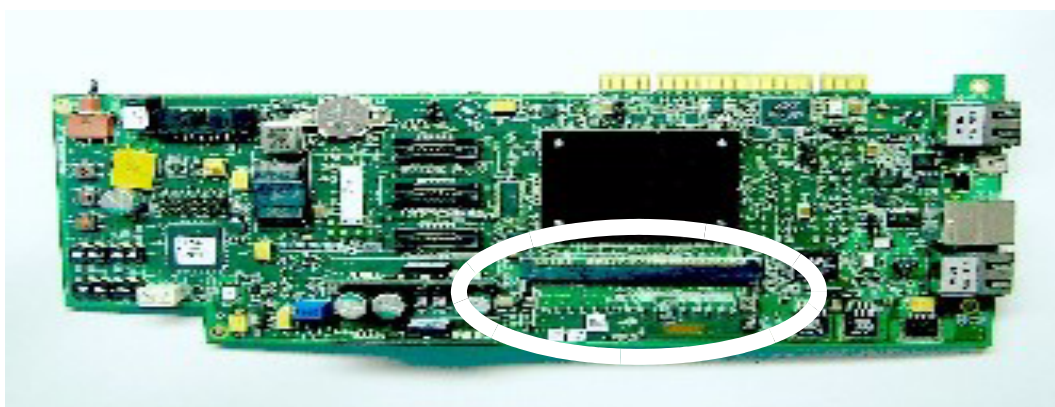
SODIMM Memory (for 40-bit - Socket U33 on top side of board)
